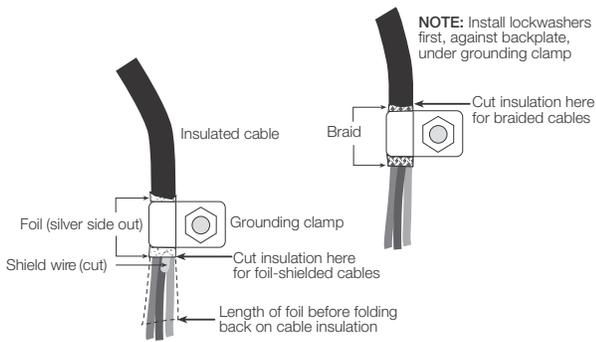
Grounding Clamp Attachment for Foil-Shielded and Braided Cabling
